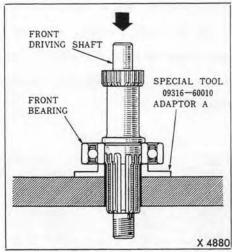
Installing the front bearing on the transfer front drive shaft.
